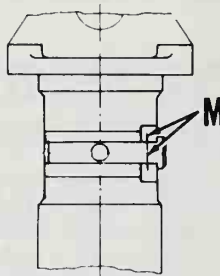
Marks (M) on injection pump body and rack should align.
